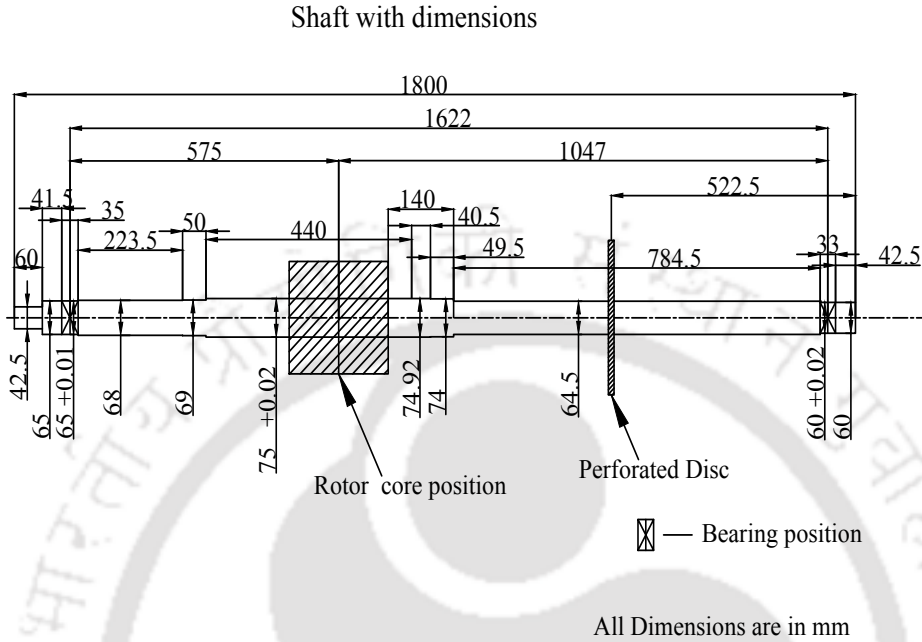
1.8 m rotor shaft (or Rotor I) with dimensions.
